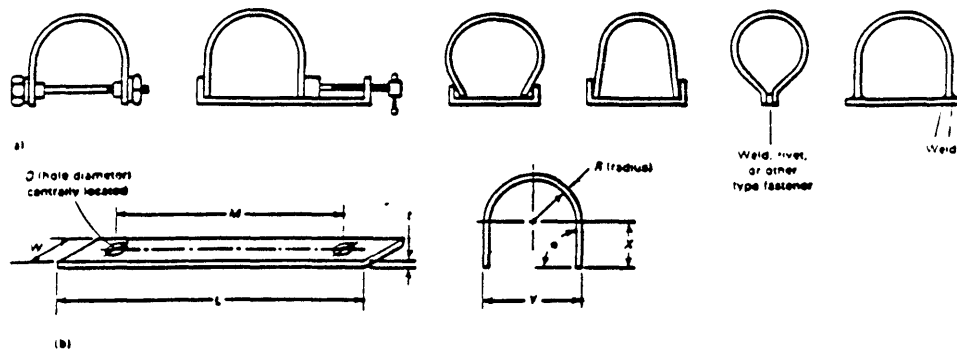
C TYPICAL U-BEND SCC SPECIMENS
